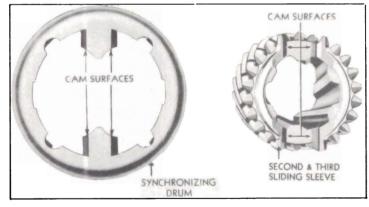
Cam Surfaces on Drum and Sleeve—Series 40-50
